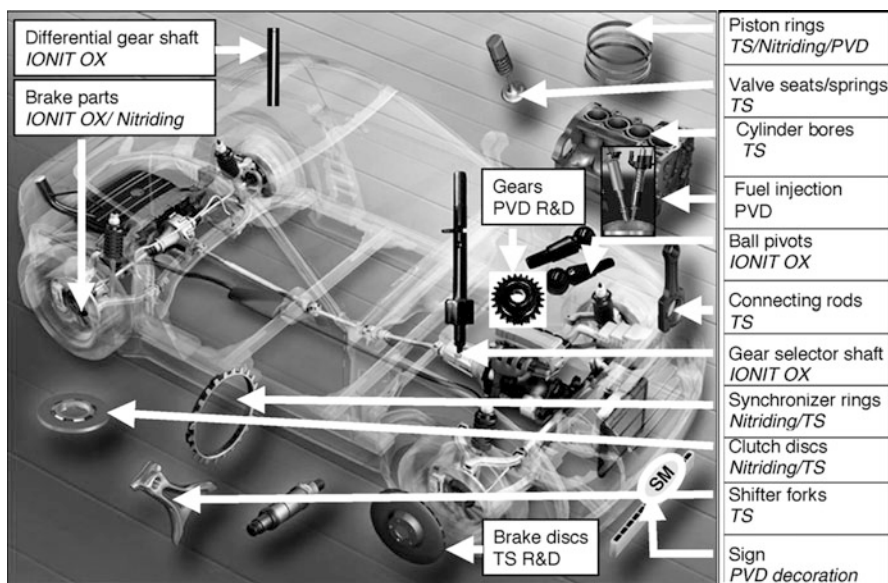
Selected parts to be treated by surface technologies in cars. Reprinted with the kind permission of Elsevier [362]
